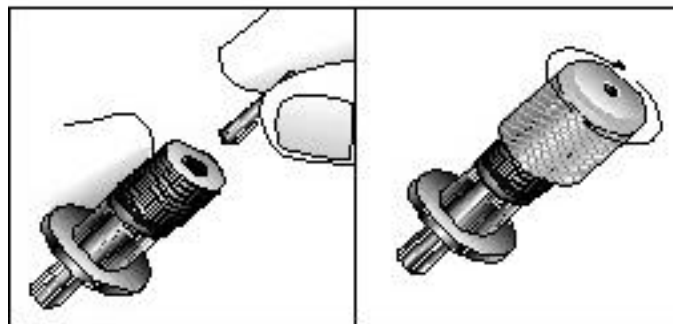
Installing the Blade and Adjusting the Foot
